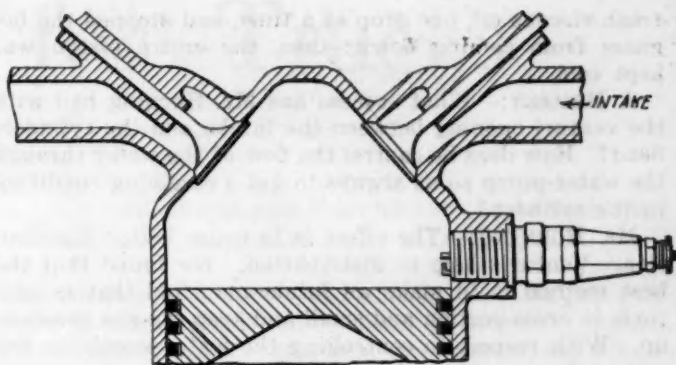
A SO-CALLED PENT-ROOF TYPE OF COMBUSTION CHAMBER IN WHICH THE INCOMING AIR IS USED TO COOL THE SPARK-PLUG
